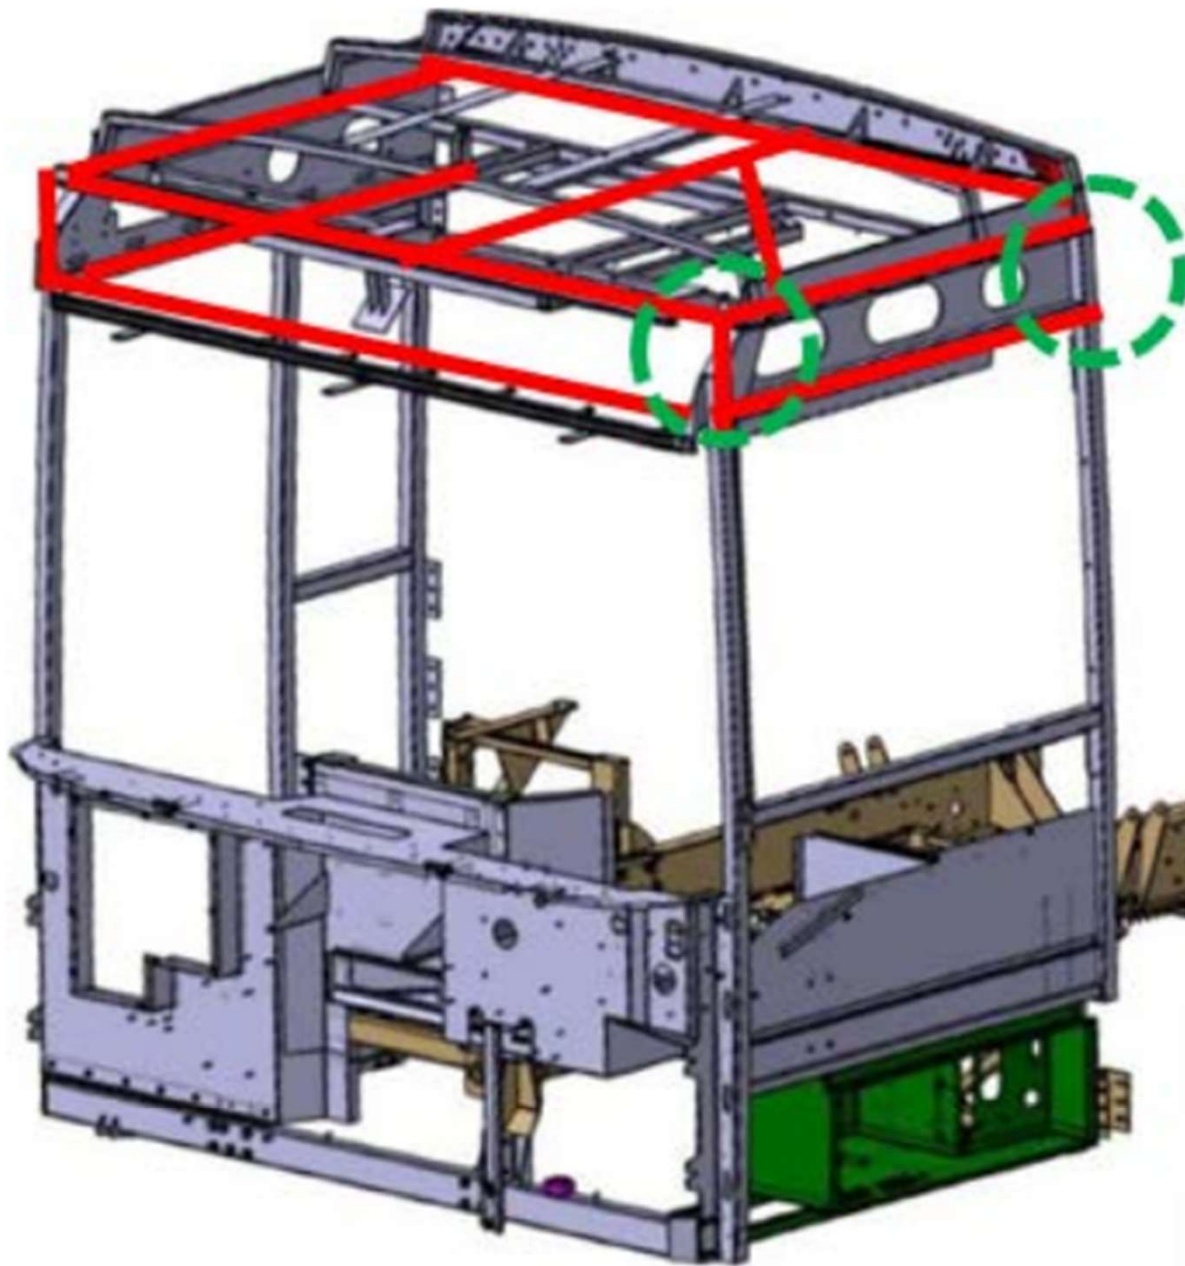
View of reinforcement proposal for roof (IDIADA).
